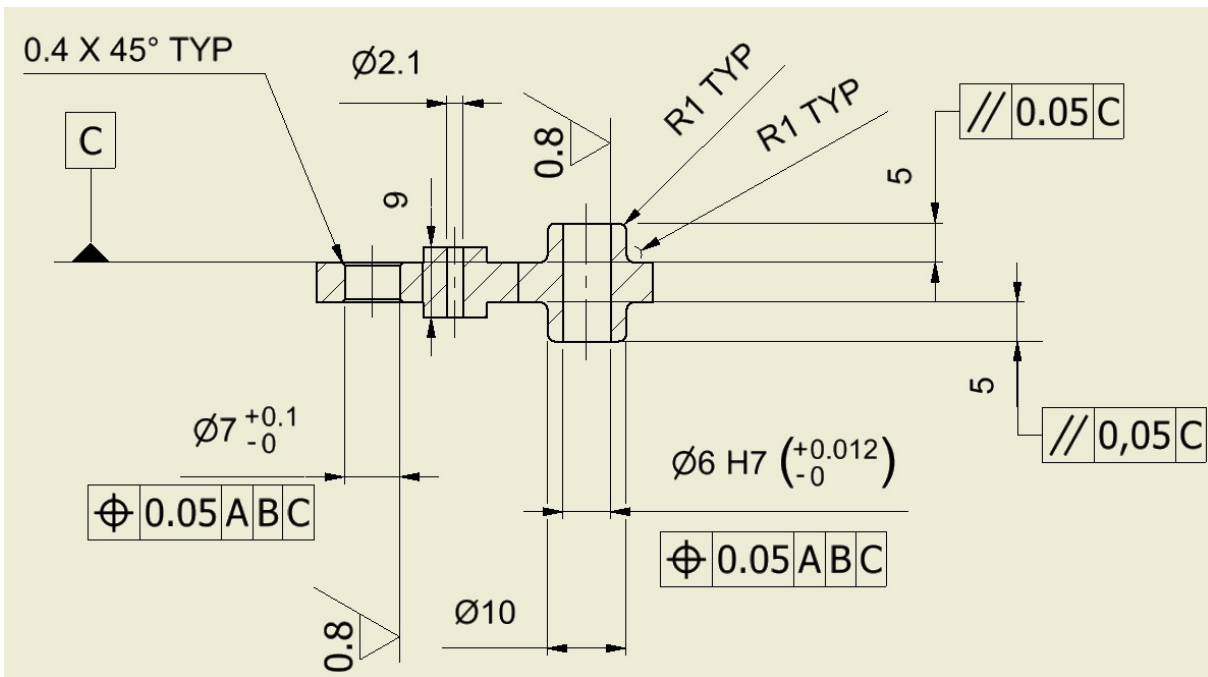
Dimensional and geometric tolerances on housing body's section.
